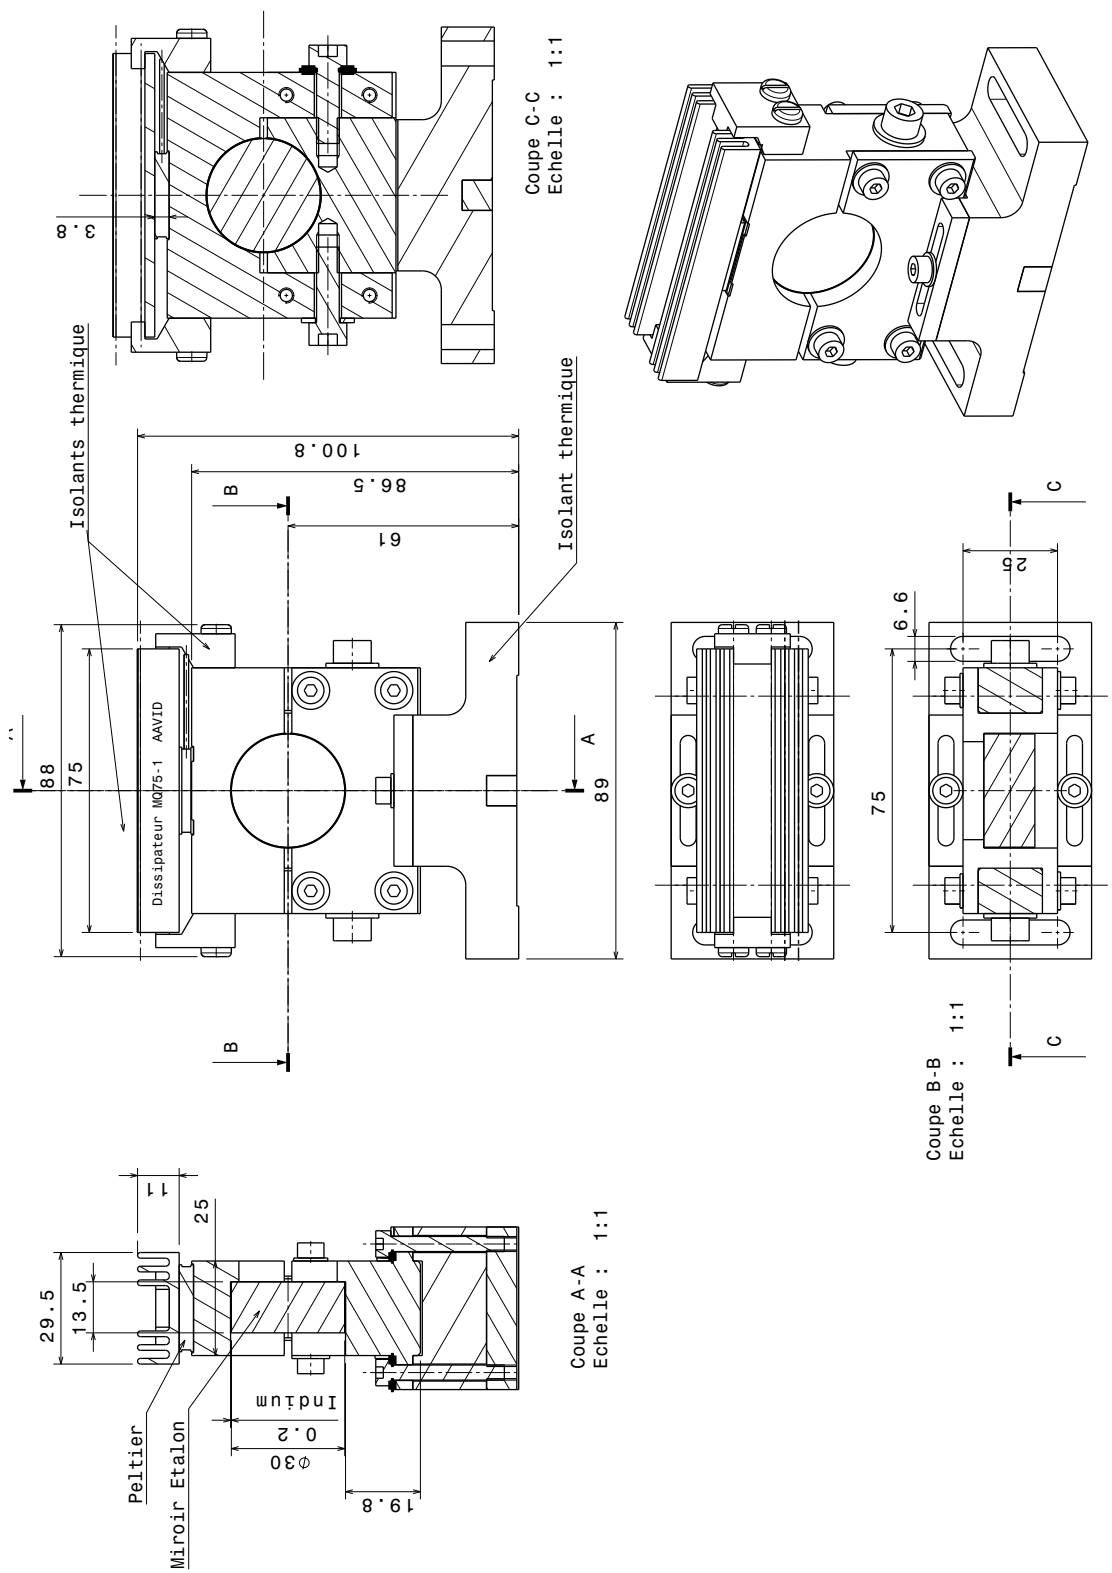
Mechanical drawing of the mounted etalon with the holder in copper, the base in ABS and the cooler, by Jean-Pierre Baronick.
